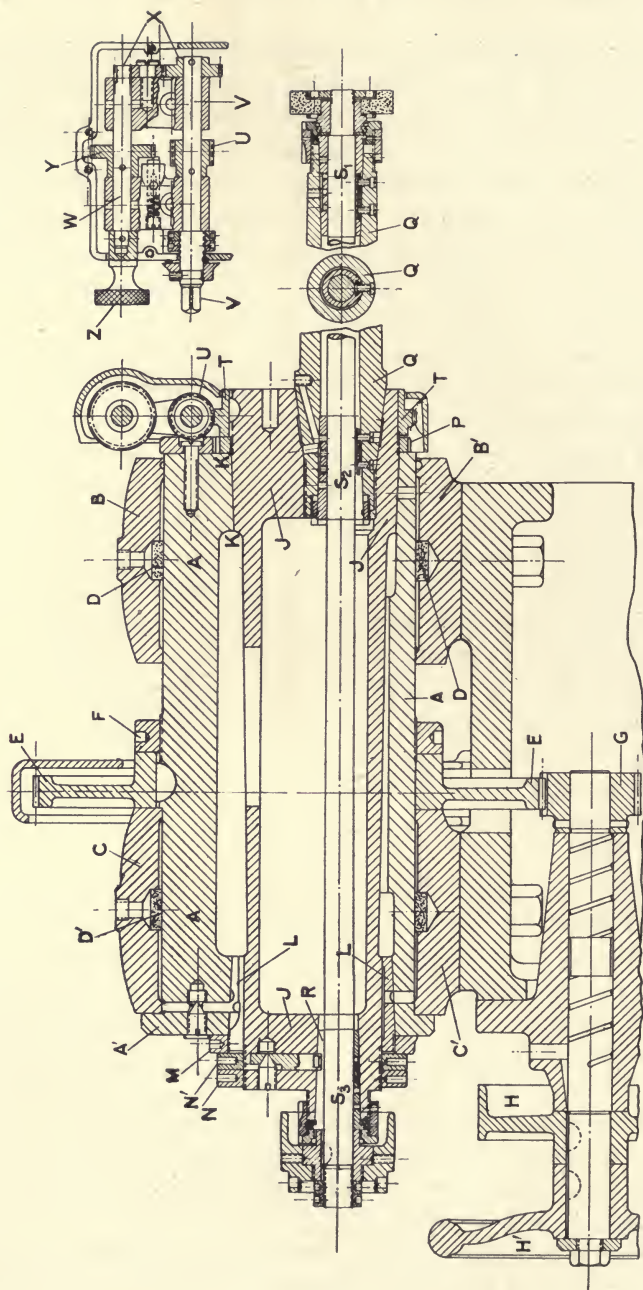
WHEEL HEAD OF HEAD CYLINDER GRINDER
